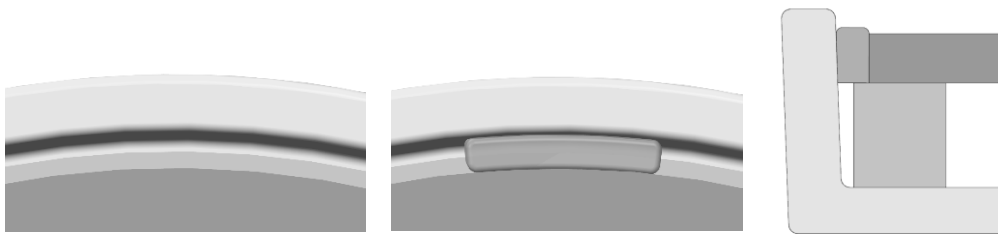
Example tolerance gap a) top view, b) top view with adhesive c) side view with adhesive.
